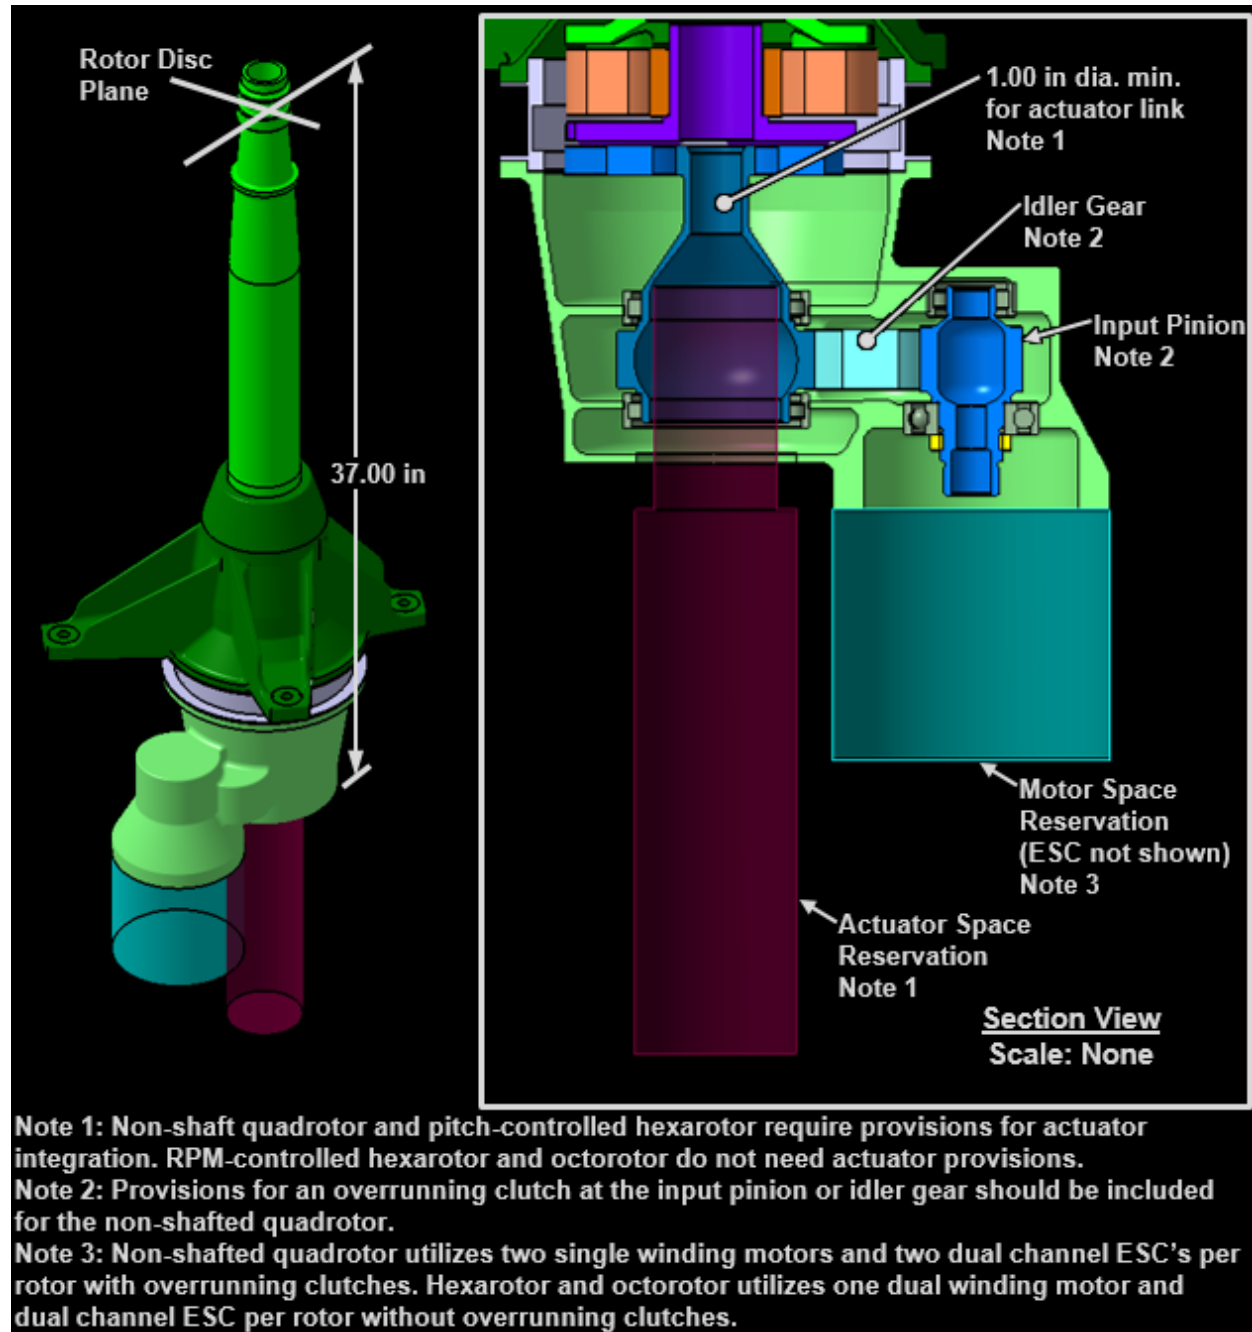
Rotor Gearbox Modules for Quad, Hex, and Octorotors without Interconnecting Shafting
